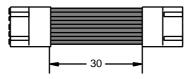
WRE027N600 Quick Connector for connecting System 27 NOVA modules.
